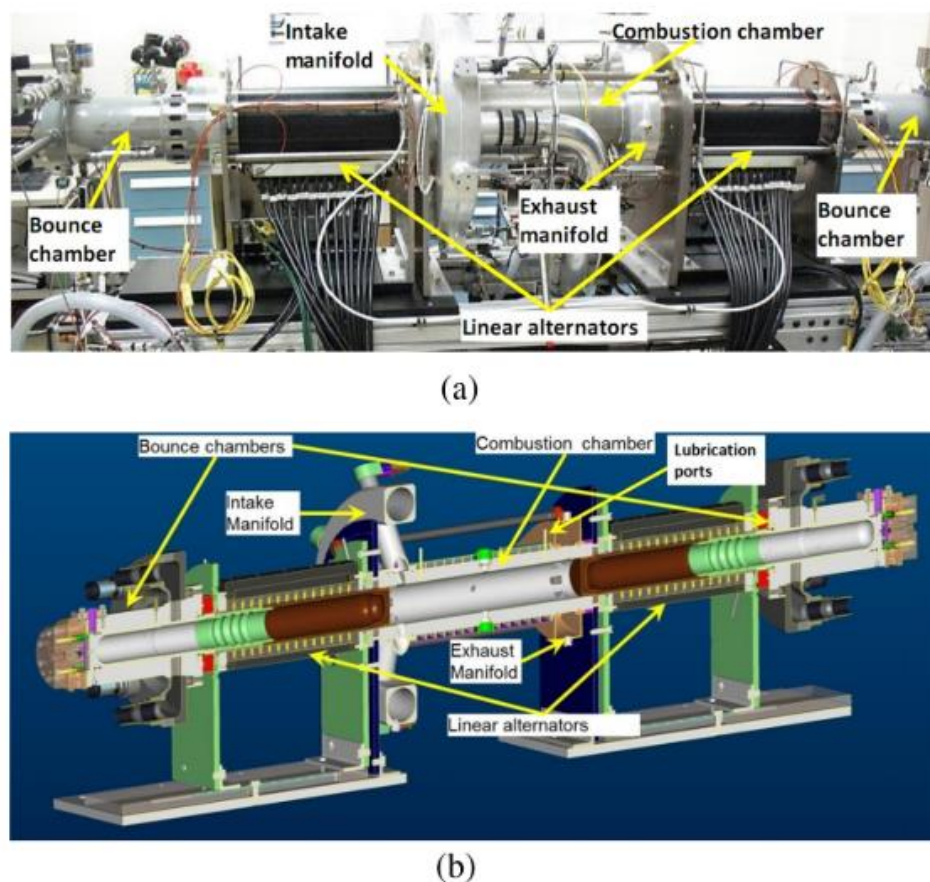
Schematic of tubular brushless permanent magnet linear engine alternator [57].
